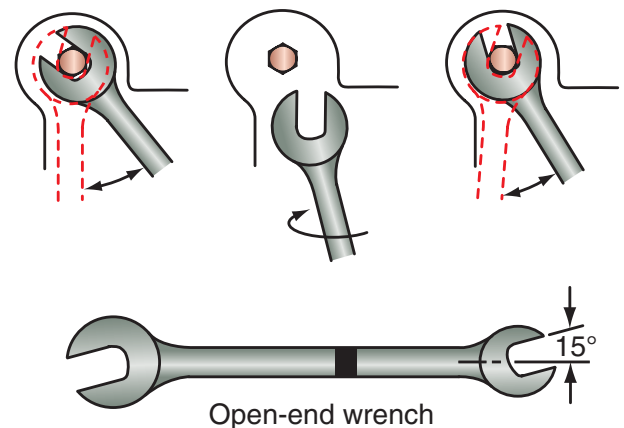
The standard wrench has a 15° head angle with a different-sized opening on each end.
